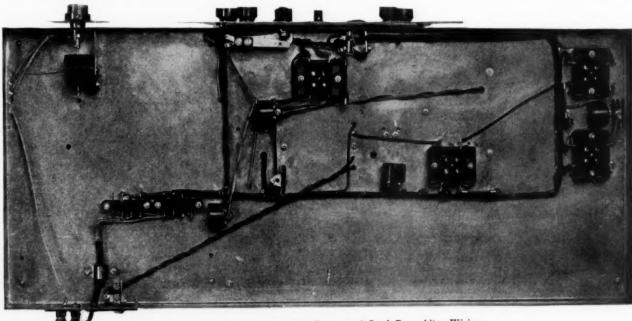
Appearance of Bottom of Steel Base After Wiring
